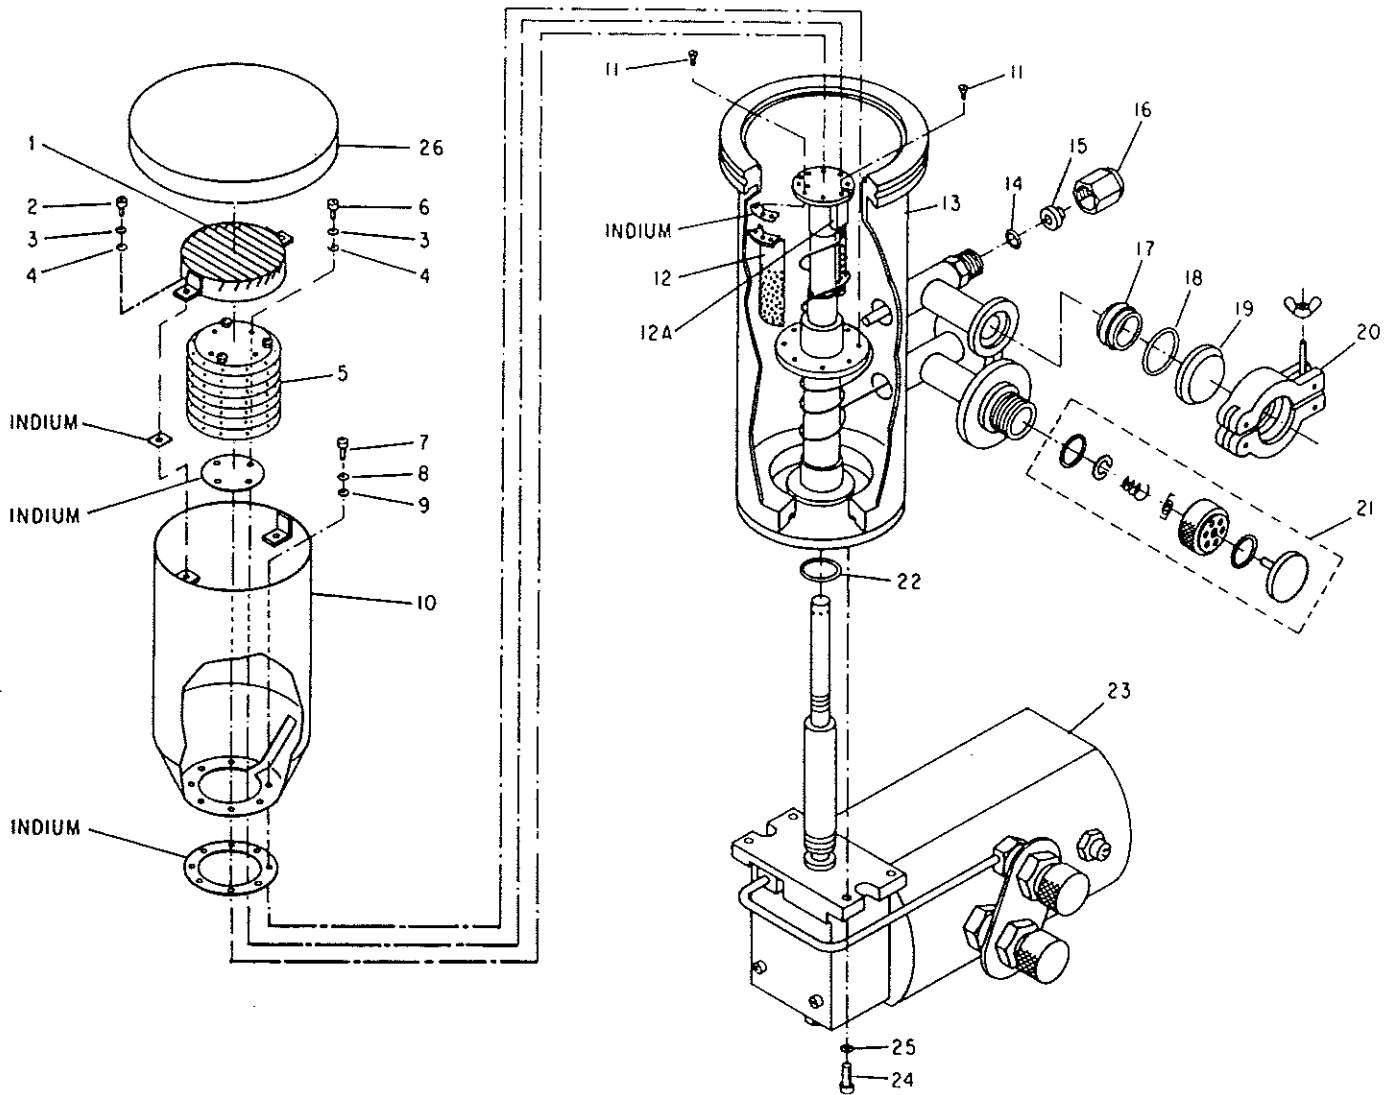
Exploded view of Cryo-Torr 100 Cryopump
